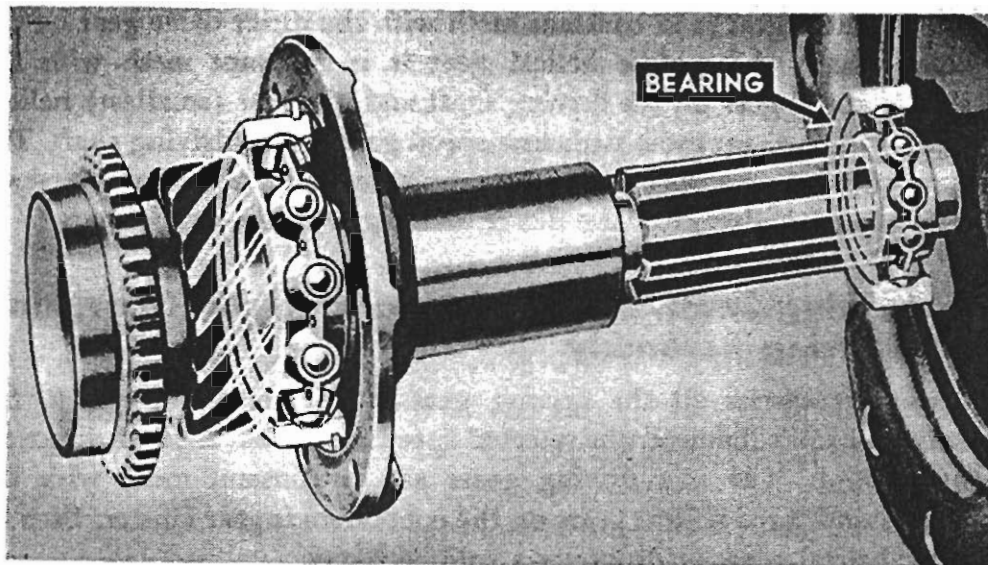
The Clutch Shaft Incorporates a Combined Helical Gear and Splined Flange.
